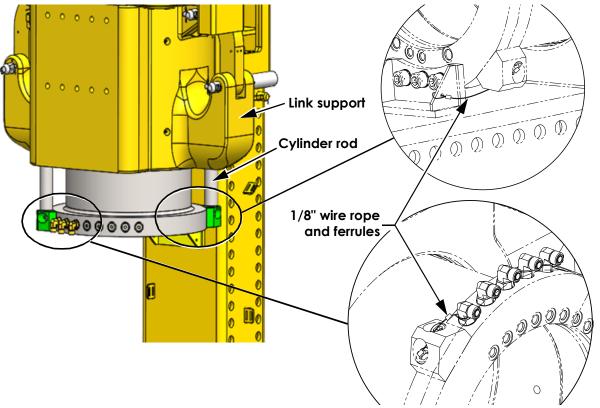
Secured Pressure Pads on Rotary Manifold Assembly
